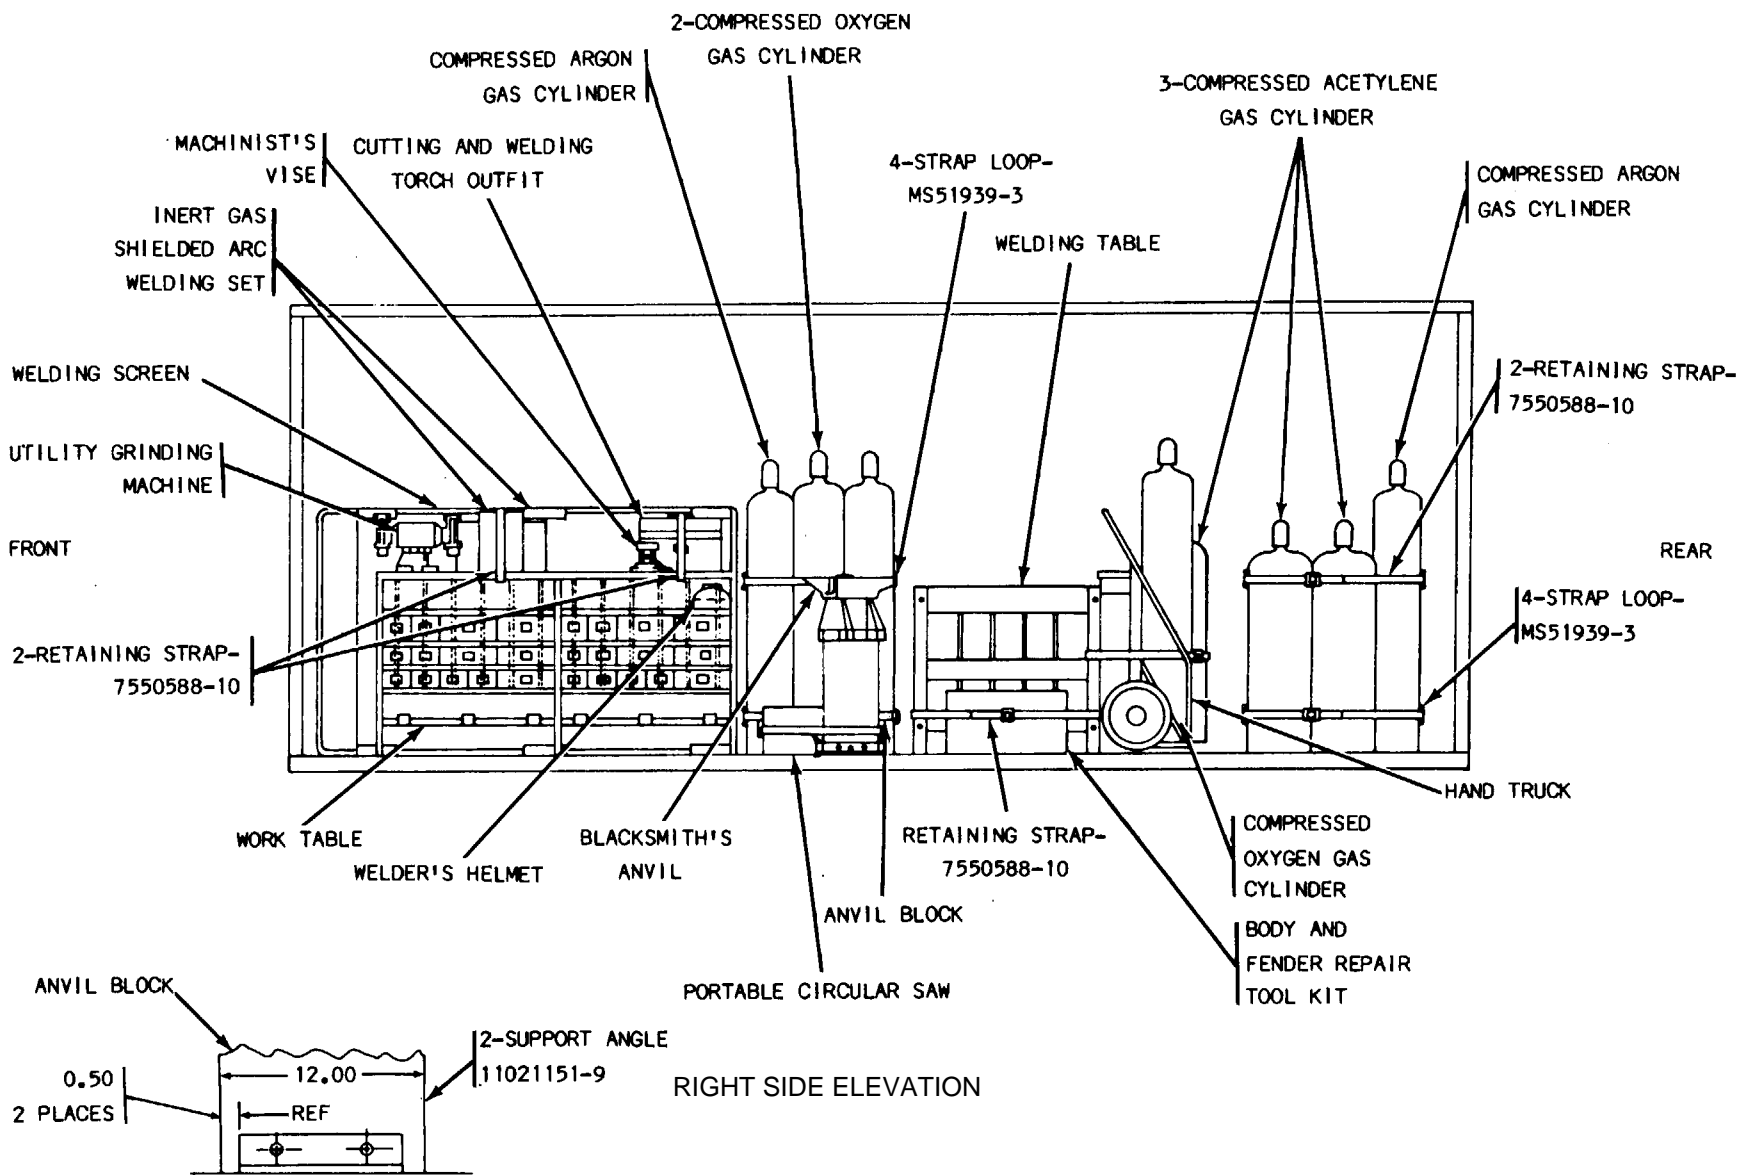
Components to be mounted right side elevation, unit 3, ISO-2-1.
